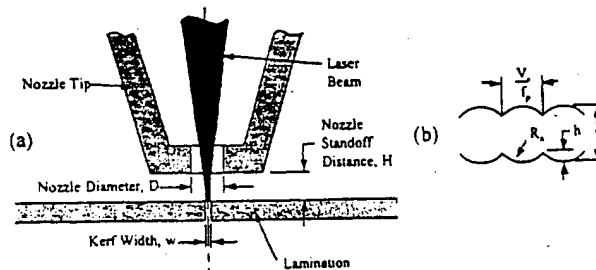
Geometry of the (a) laser cutting nozzle and (b) cut from a pulsed Nd:YAG laser
